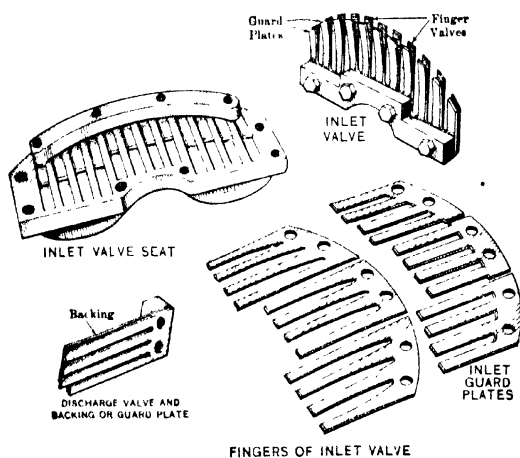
Sullivan Plate Valve, Low Pressure Cylinder, Angle-Compound Compressor, Class "WJ 3"
